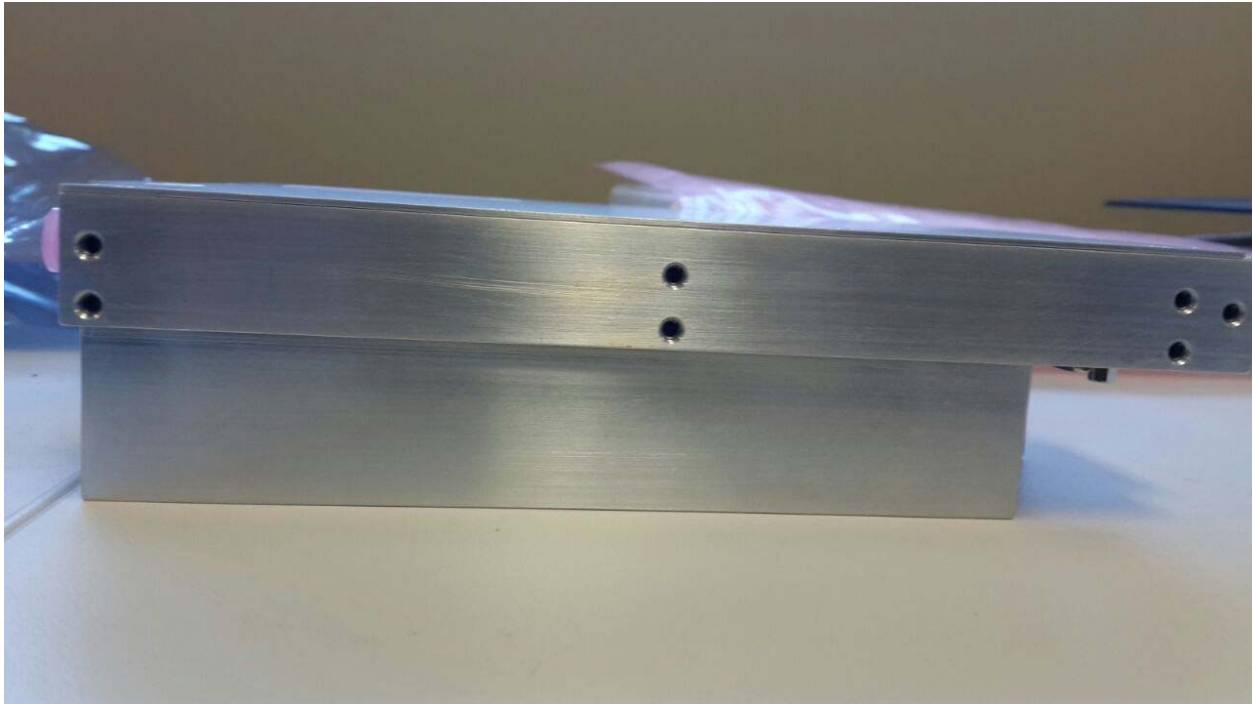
1394-F-1240 Rev J PA SCD FMPA Left Side View
